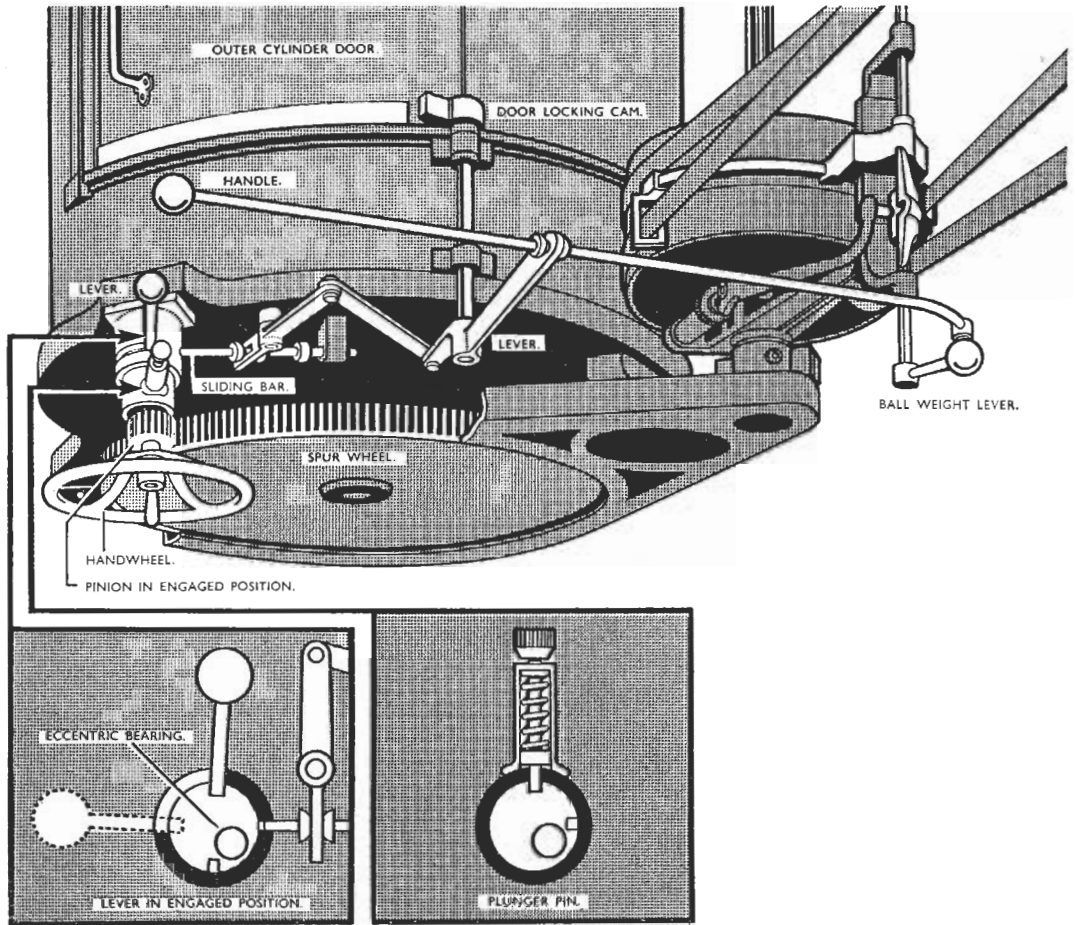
Door locking and hand turning gear for Ritchie No. 2 washing machine.
